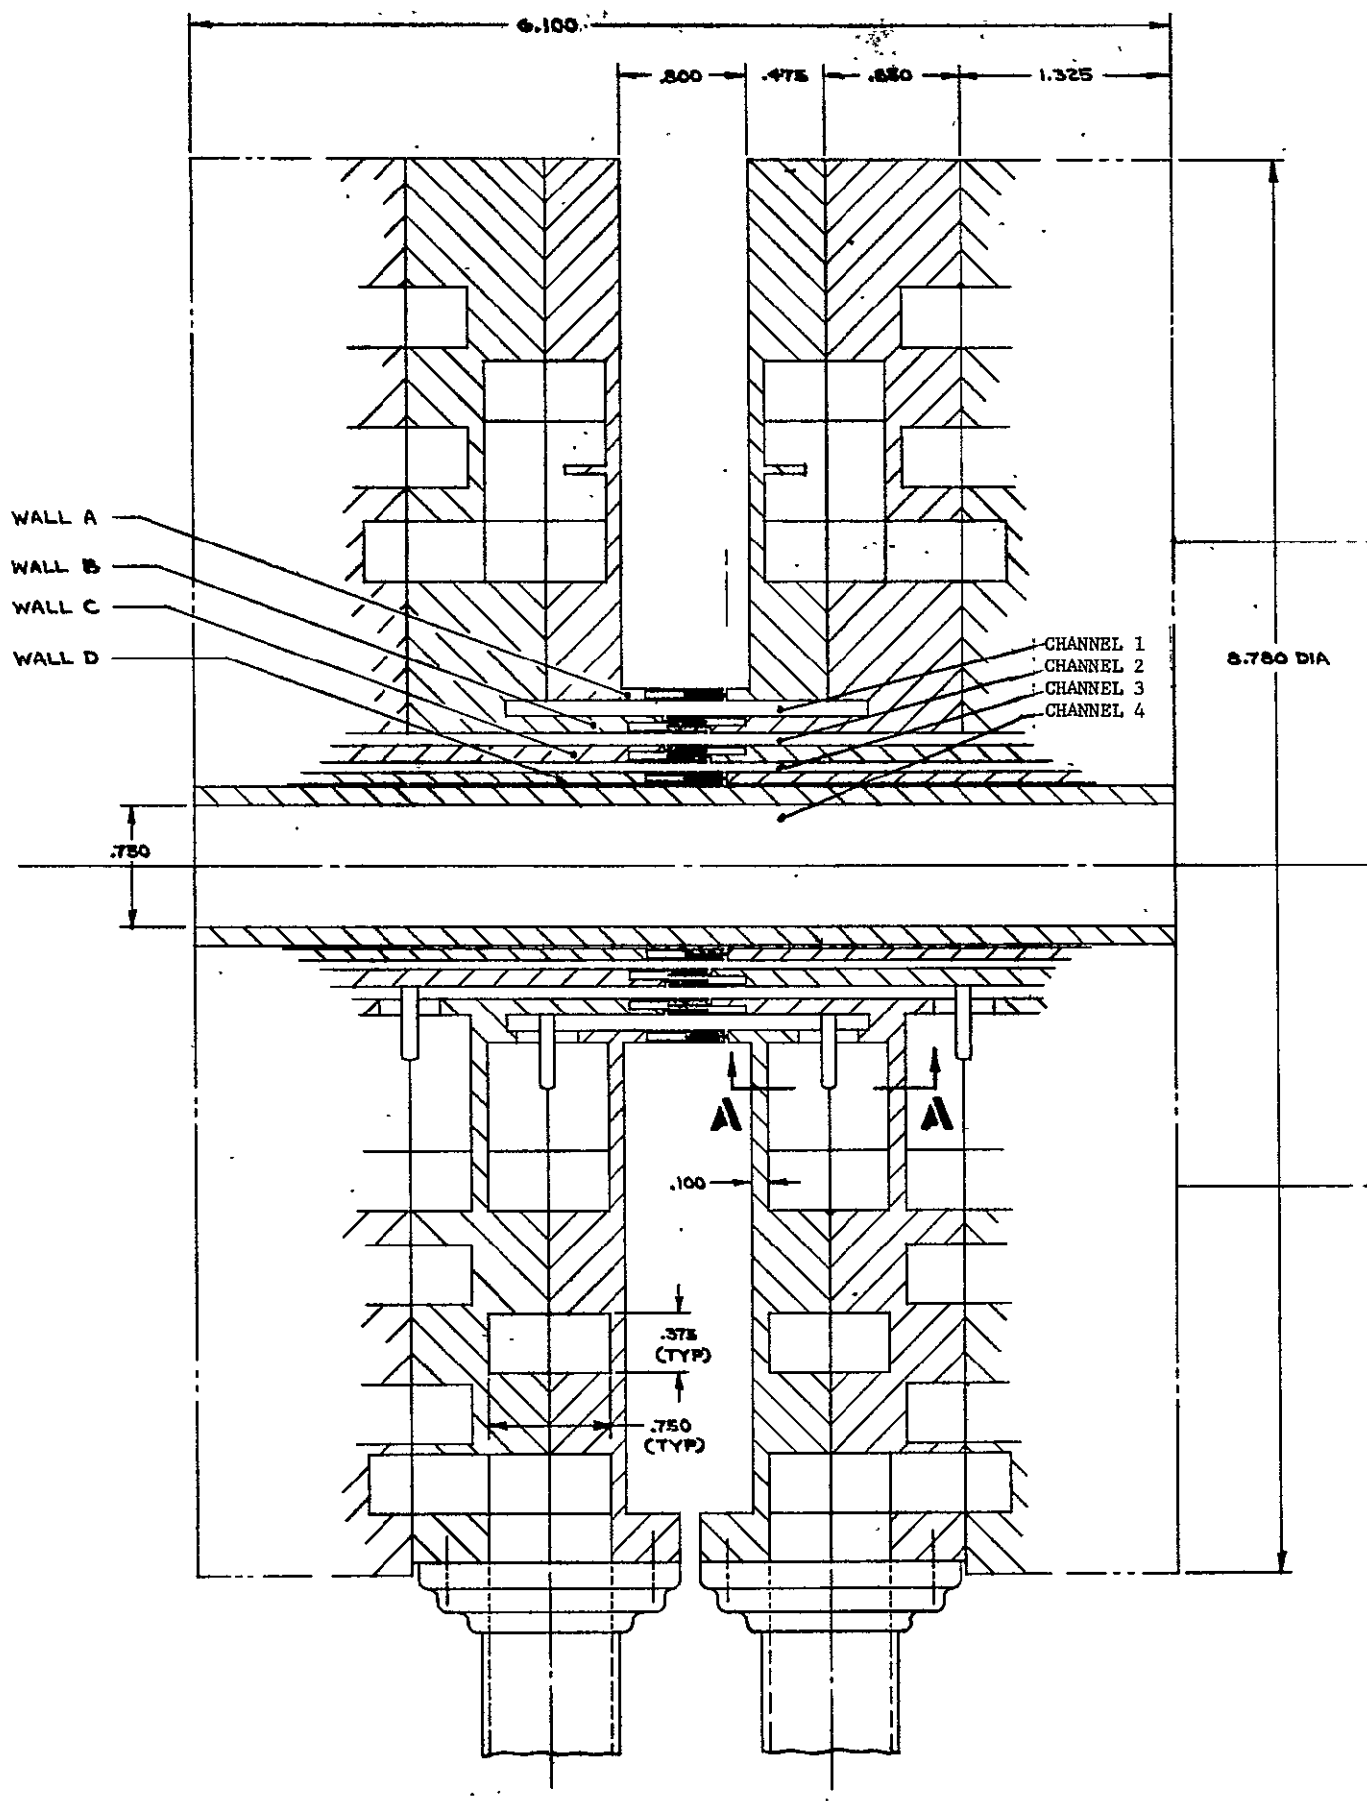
DETAIL OF WAVEGUIDE SECTIONS, 4-CHANNEL ROTARY JOINT
